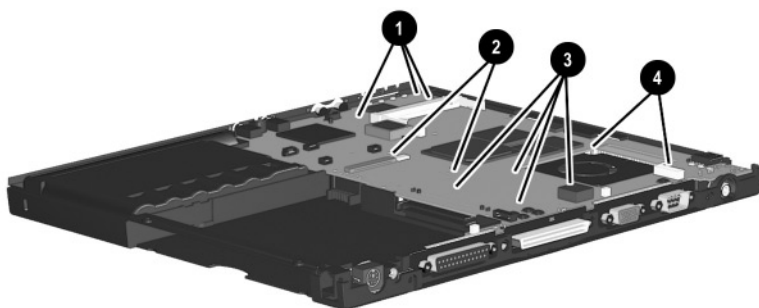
Removing the System Board Screws and Screwlocks
